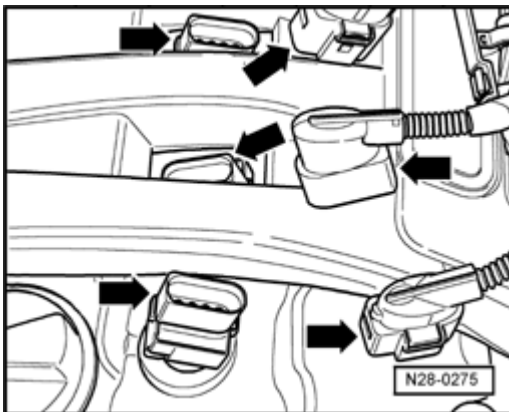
Identifying Removed Ignition Coils, Power Output Stages & Connectors
